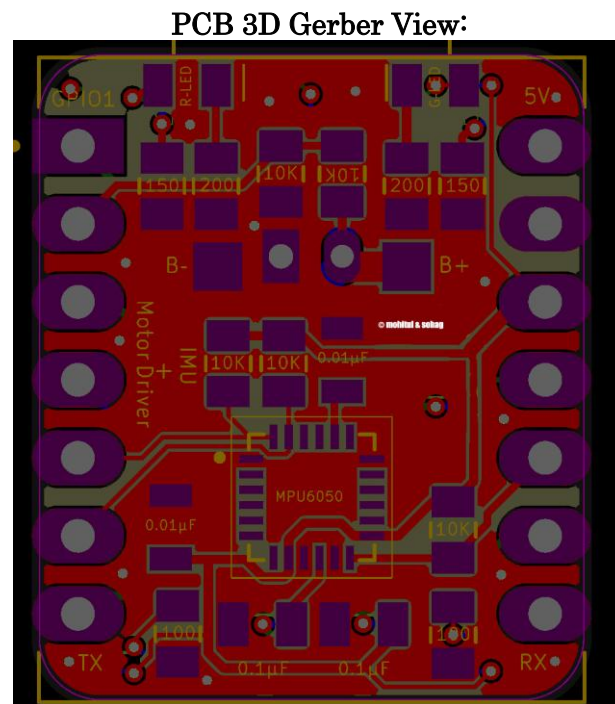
(3D Gerber View of Kokil's PCB) Top View
